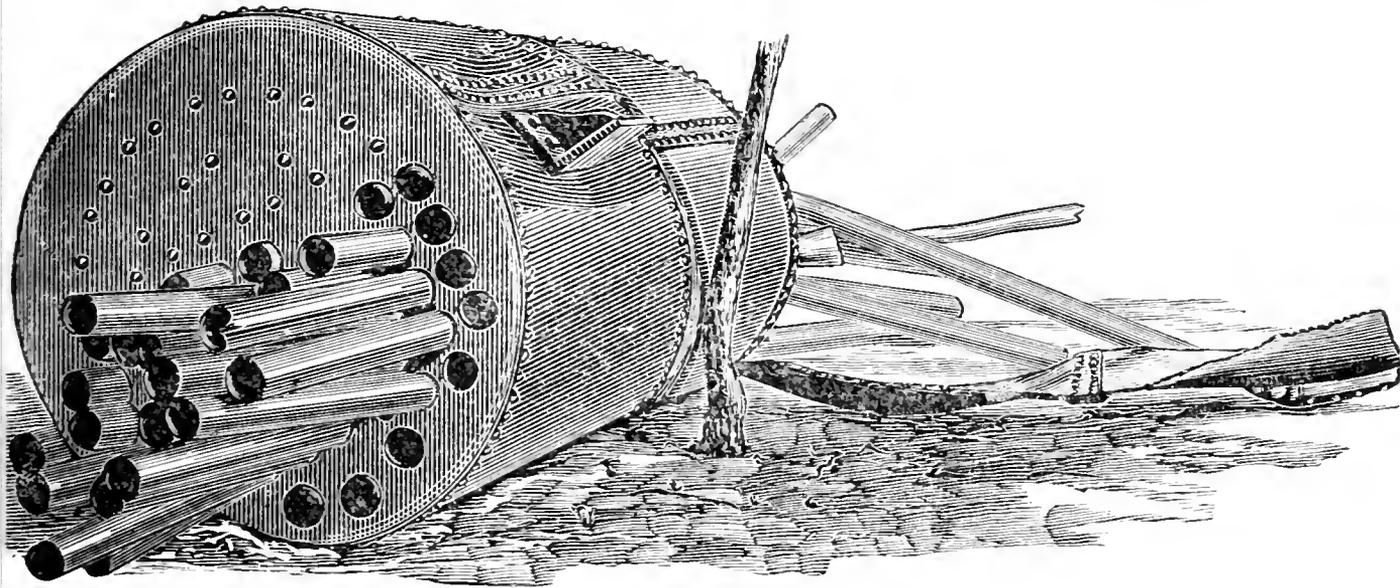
Rear view of the part of No. 3 boiler which is shown in Fig. 2.
